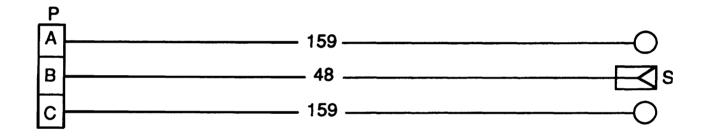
Accessory Control Box Cable Assembly (12330270)
